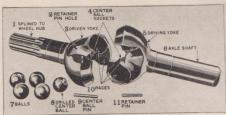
AXLE SHAFT UNIVERSAL JOINT
